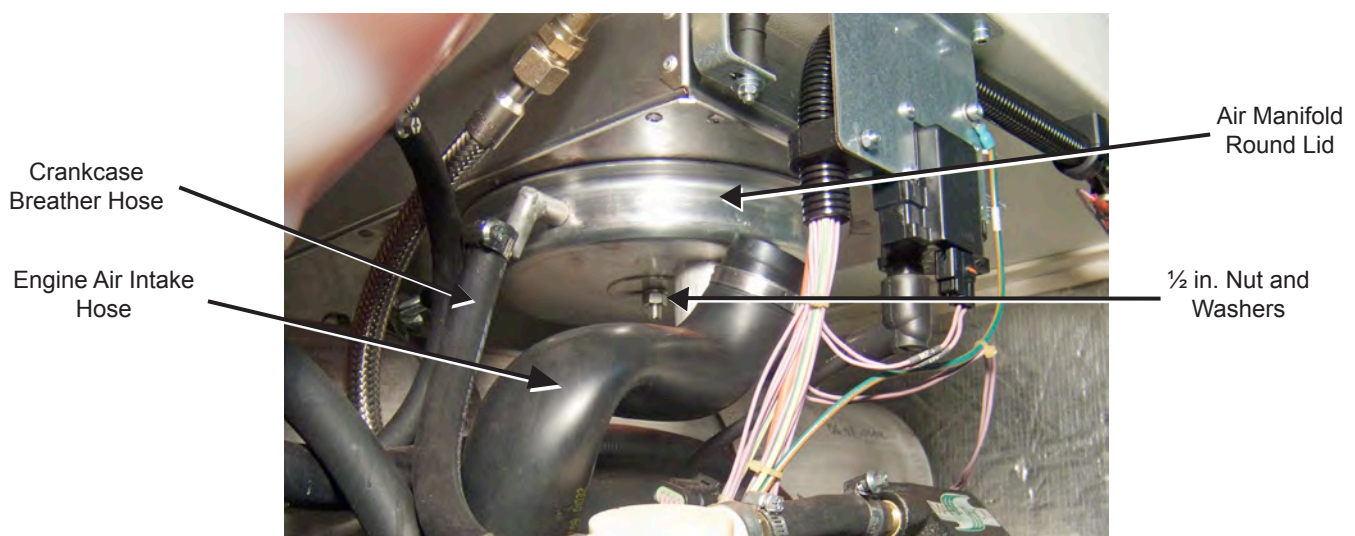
Engine Air Intake and Crankcase Breather Hoses Removed from the Air Intake Housing Round Lid
